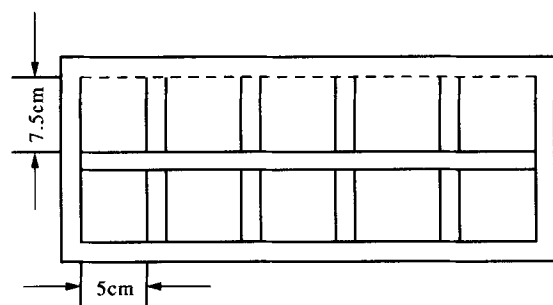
Diagram of casting plate showing the dimensions of each section.
